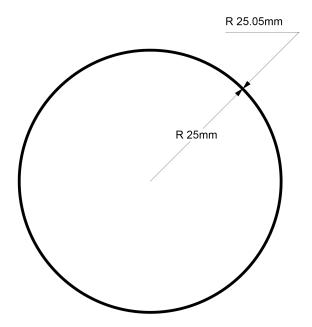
Sketch of proposed Kapton ring showing the inner and outer dimensions for a 50 mm diameter ring.
